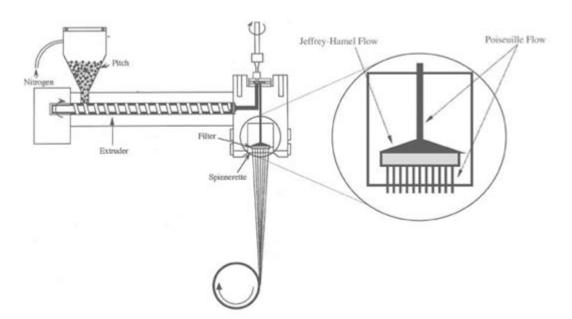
A typical melt spinning machine with a screw extruder. [26]
